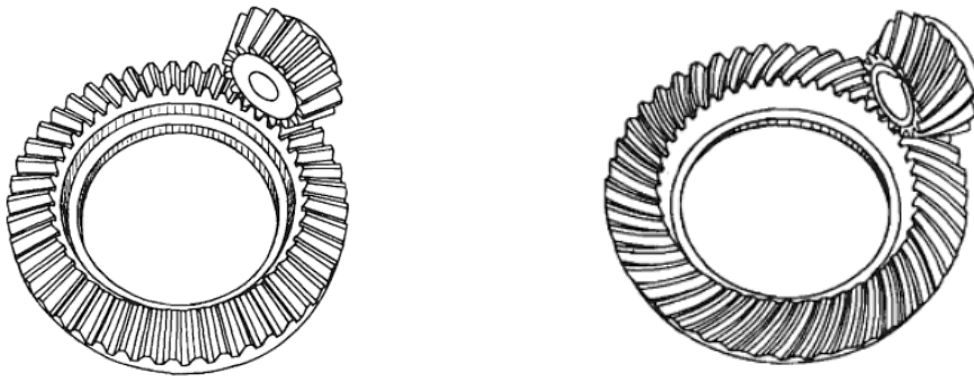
STRAIGHT BEVEL GEAR PAIR (LEFT) AND CURVED-TOOTH HYPOID GEARS (RIGHT)
